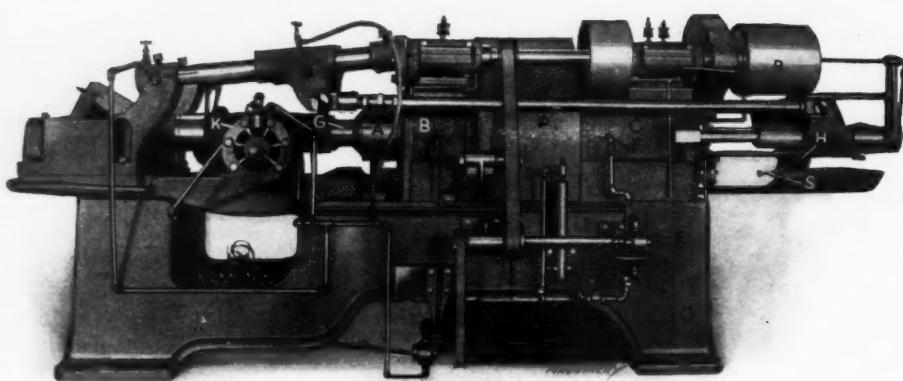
Warren Hydraulic Lathe for External Machining Operations on Shell Forgings
